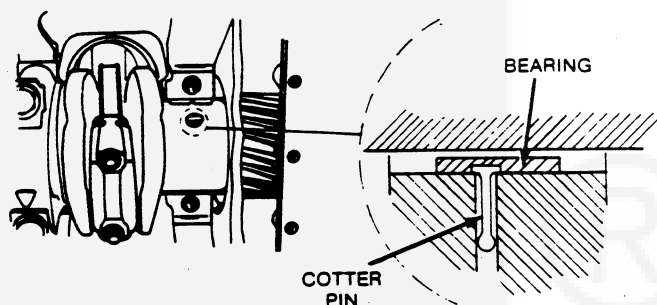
REMOVING UPPER MAIN BEARING SHELL
